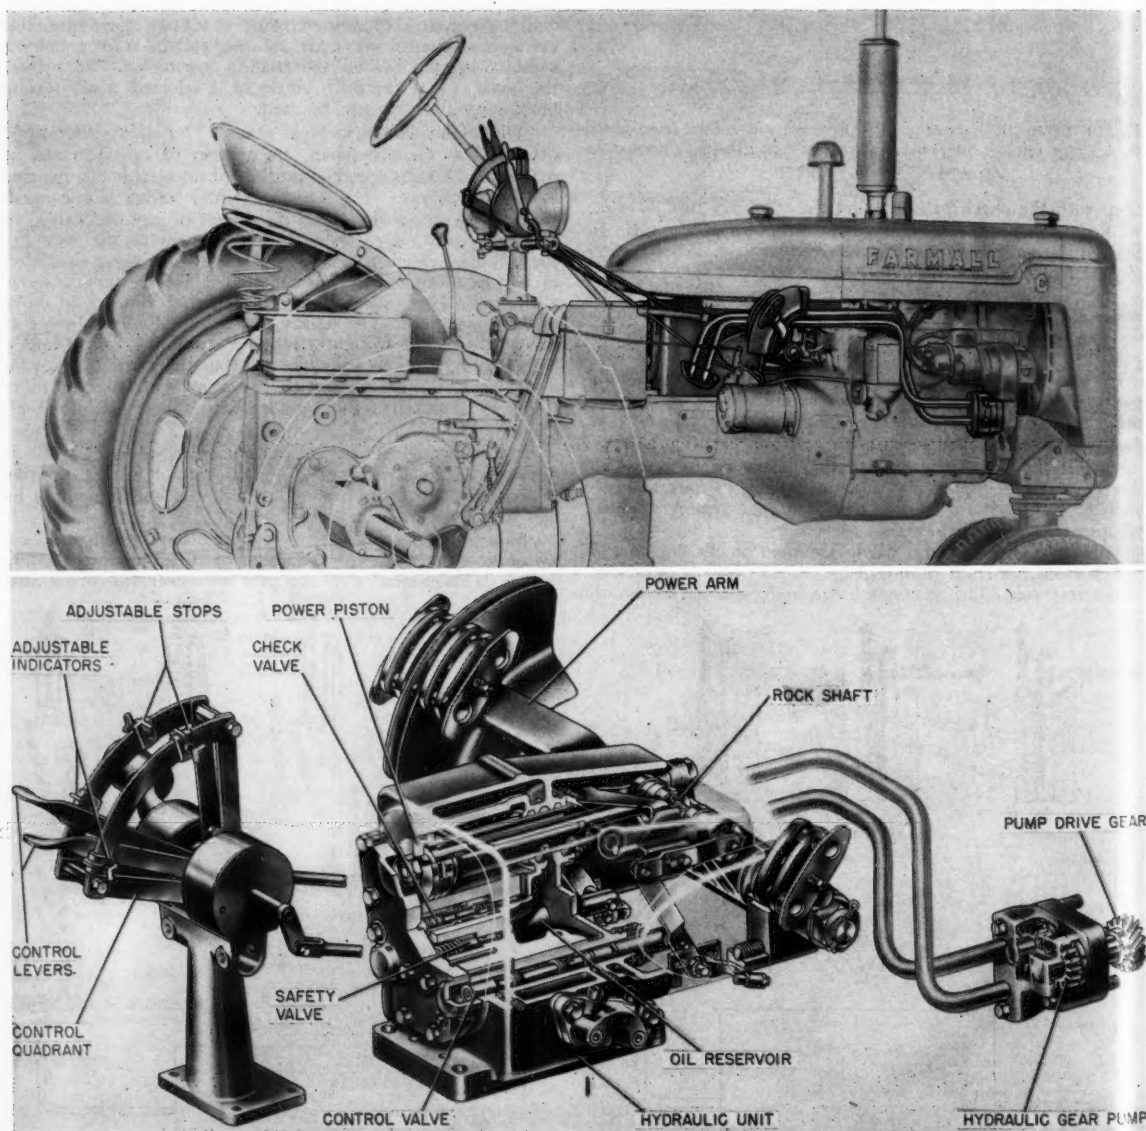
(Top) International Harvester Touch Control hydraulic unit mounted on a tractor • Fig. 14 (Bottom) A cutaway view of the Touch Control unit
